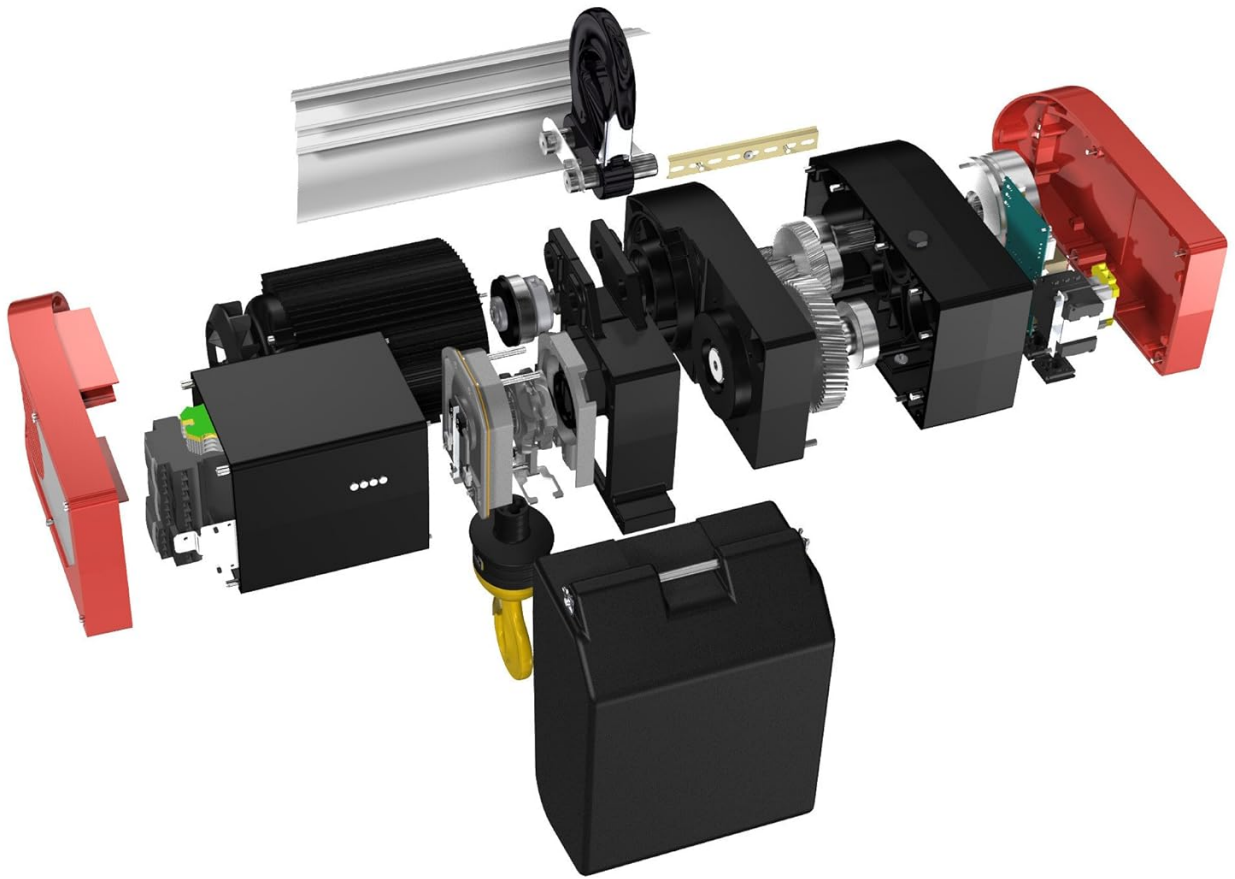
An exploded diagram illustrating the internal components of the CLX Hoist, including the motor, gearbox, brake, and electrical housing.
